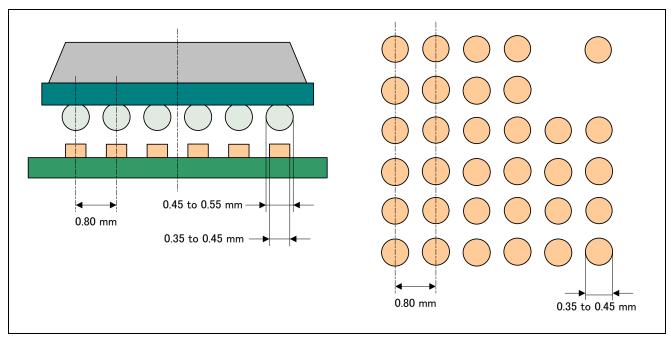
Mount Pad Sizes (17 mm Square BGA Package)
